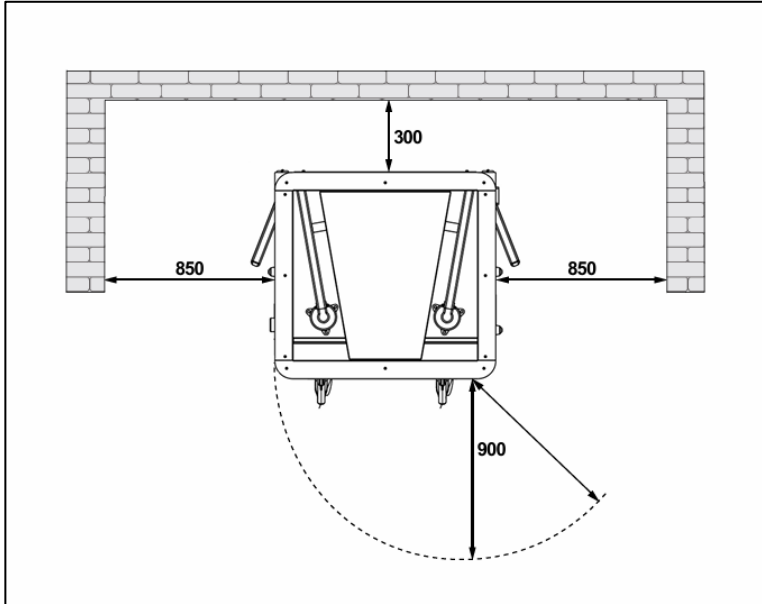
Installation spacing requirements of cabinet (Unit: mm)
